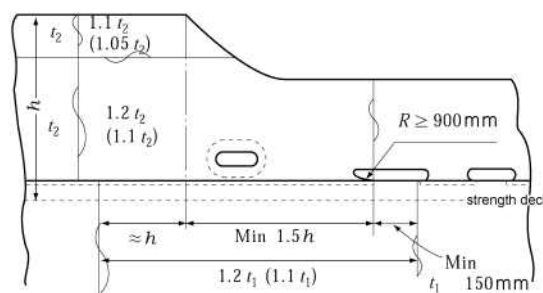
Construction of end part of superstructure (with expansion joints)
